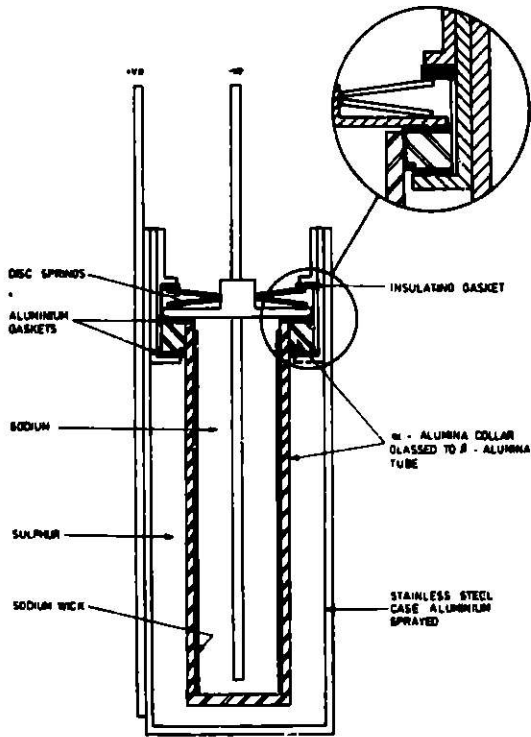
Sodium Sulphur Tube Cell With Disc Spring Seals Assembly
